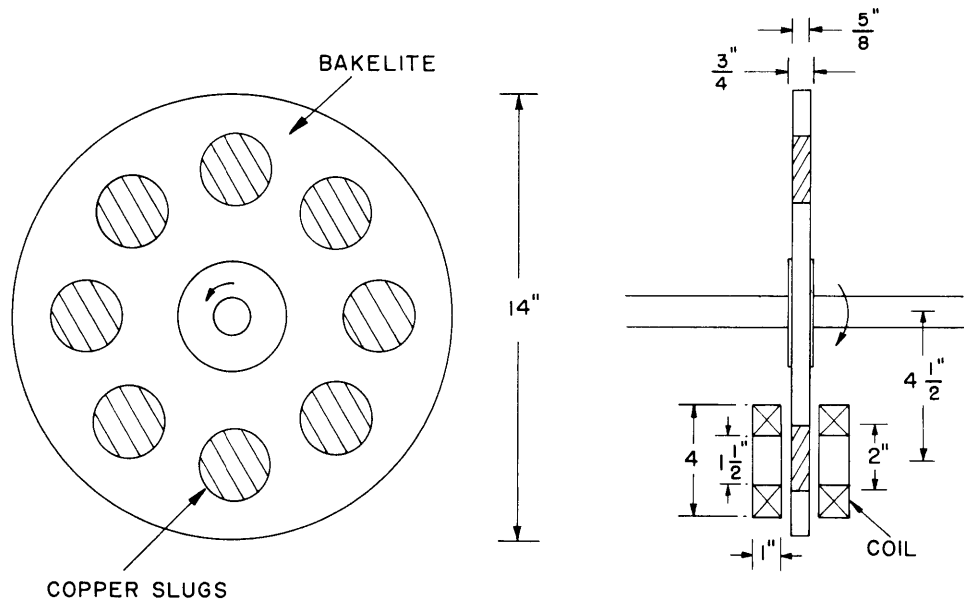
Two views of wheel with position of coils shown in end view of the wheel.
